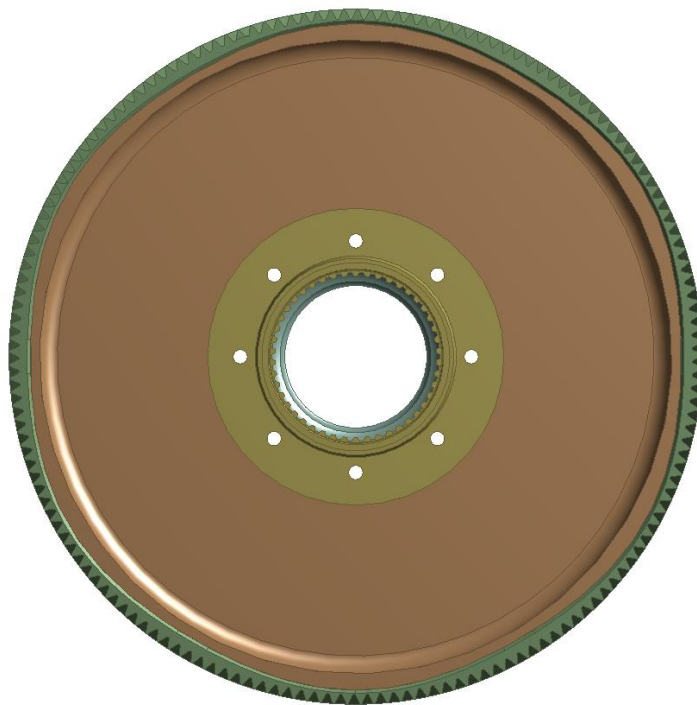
Top view of hybrid gear with mechanical interlock concept (mechanical fasteners at inner interface not shown).
